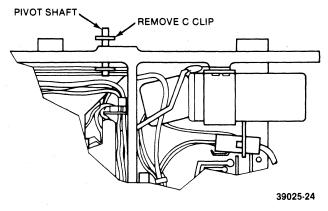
CARTRIDGE GUIDE REMOVAL
